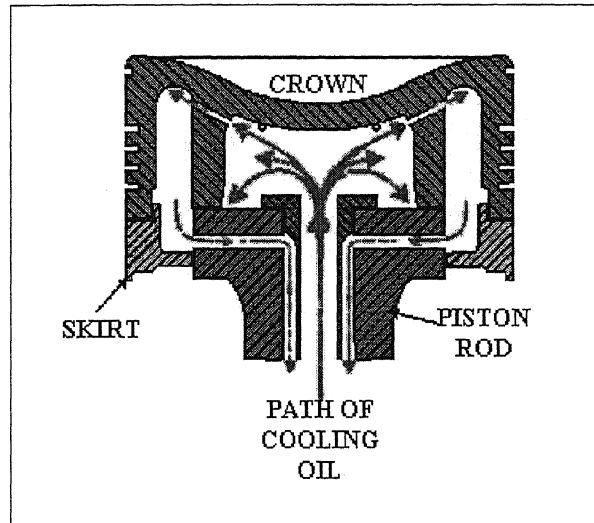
Piston Cooling with the help of Pressure Lubricated Oil Emerging from Small End Bearings [4]
